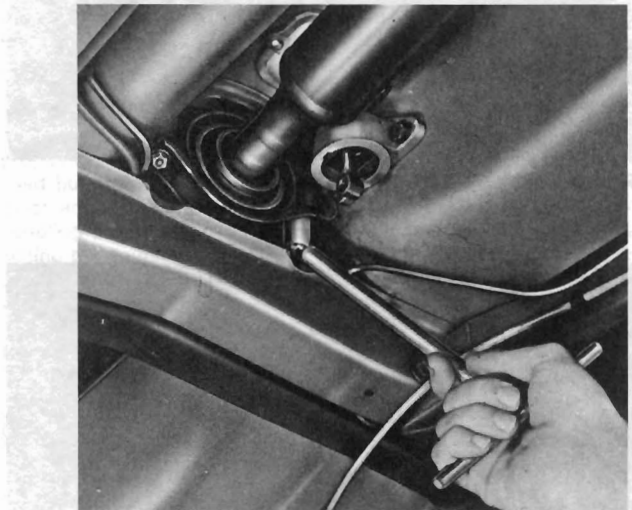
Unscrewing the propeller shaft centre mounting (Sec 2)
